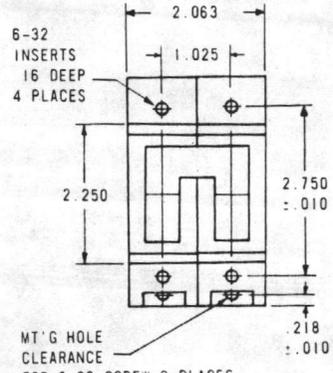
UFOV 250/260 OUTLINE DRAWING
